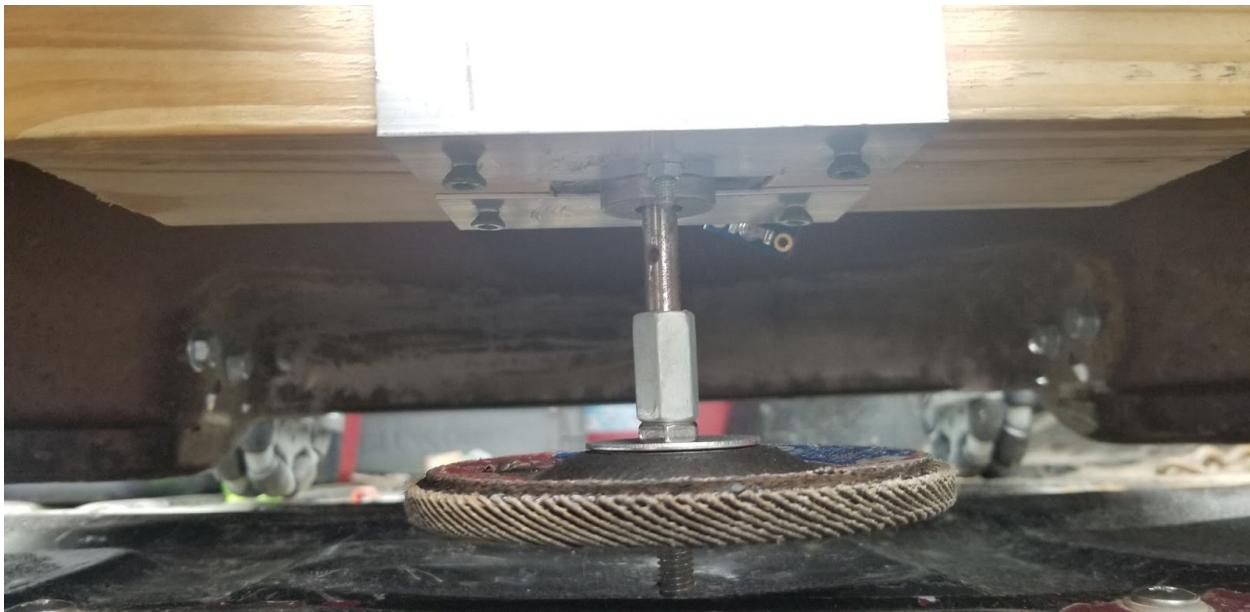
Bottom view of blade Mounted to Blade Motor. Flap disk used in testing for safety
